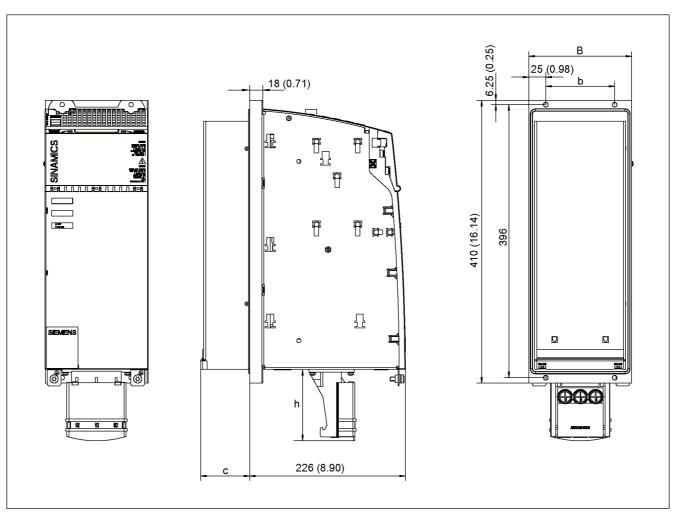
Dimension drawing of Motor Module with external air cooling (45 A, 60 A, and 85 A)
